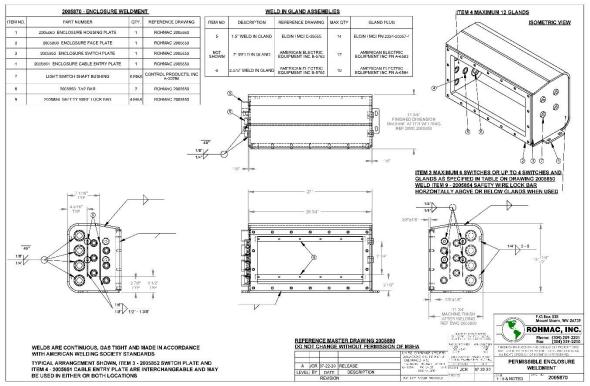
Revised XP Enclosure Weldment Drawing
